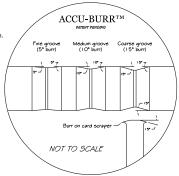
Fig. I. Close-up of the Accu-Burr™ grooves, showing simultaneous formation of a burr on both sides of the scraper.
